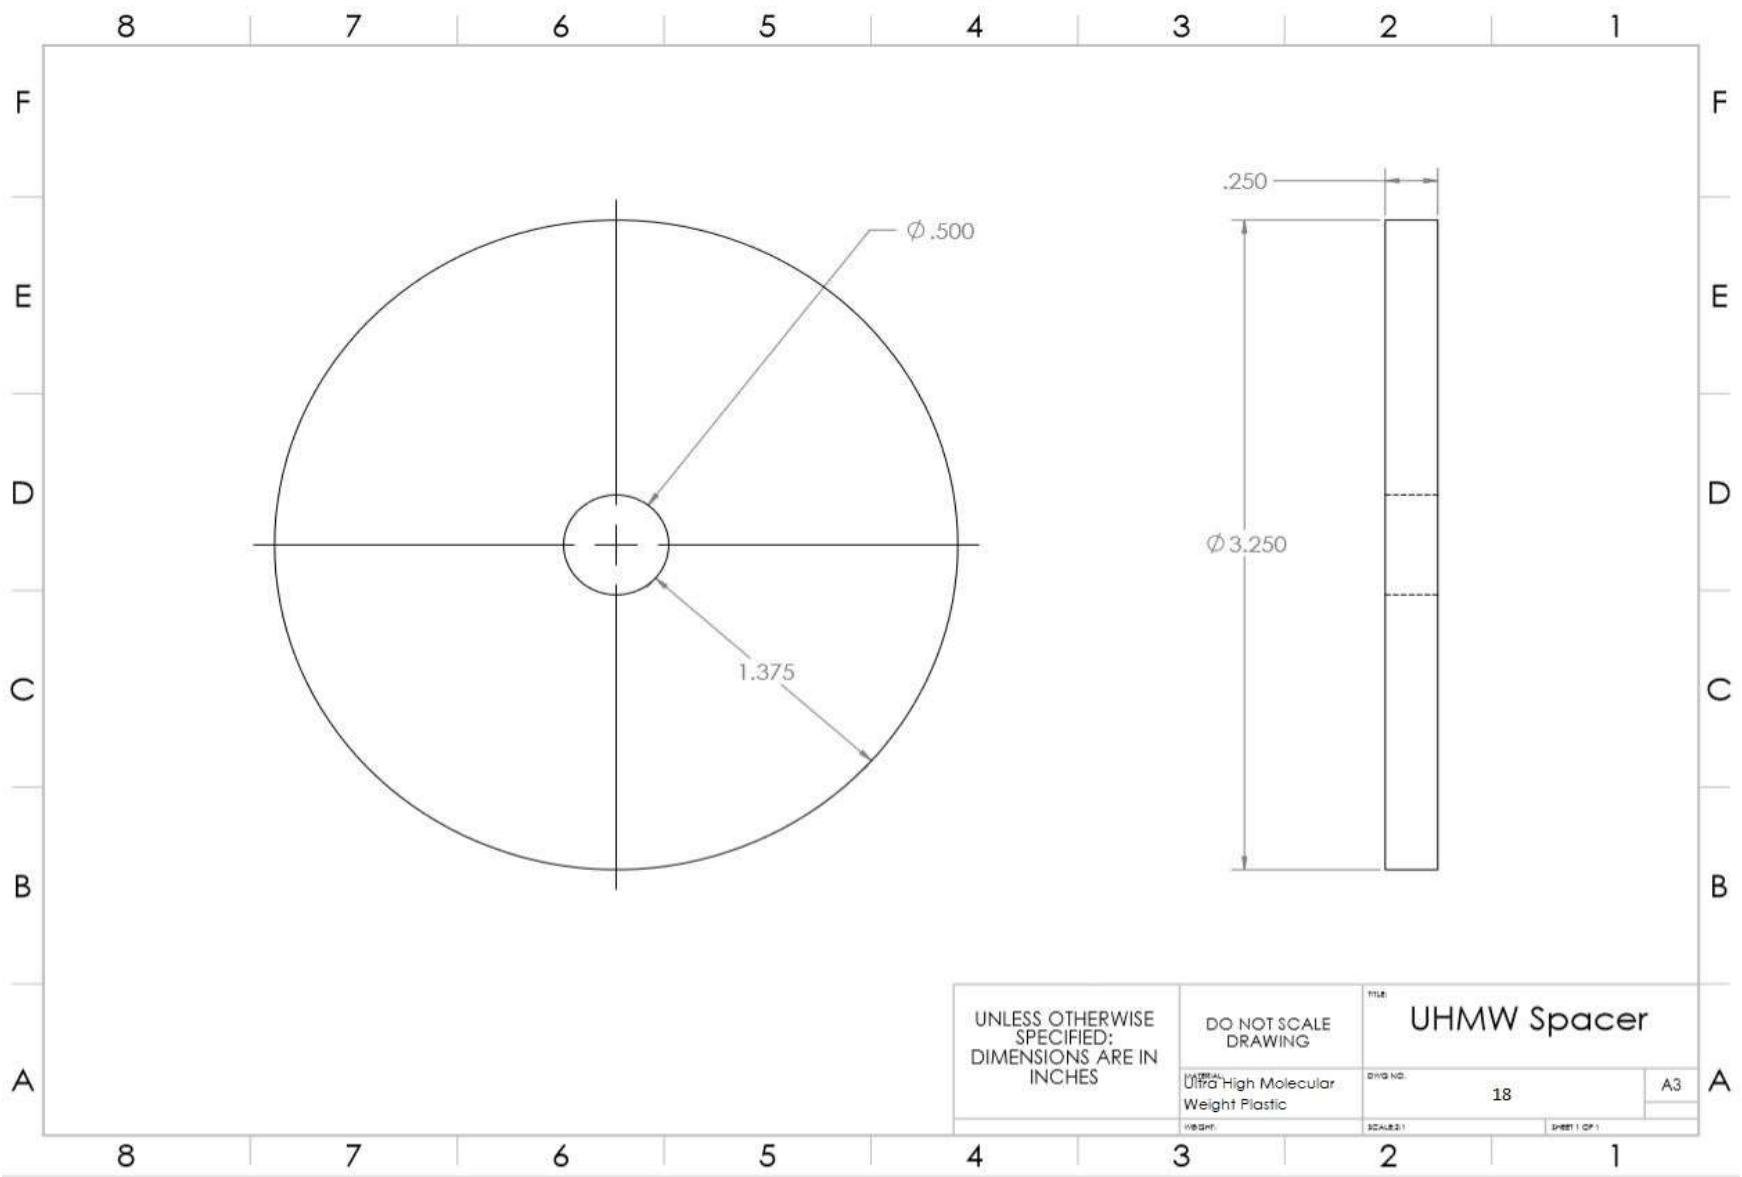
16. Mechanical Drawing of UHMW Spacer.
